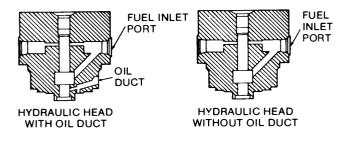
Identification of hydraulic heads with oil lubrication ducts.
